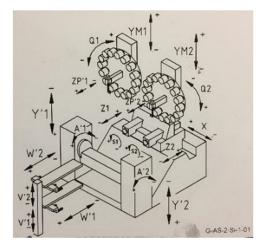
Spindle position in GROB 520 machining center by GROB-WERKE GmbH & Co. KG (2017)
